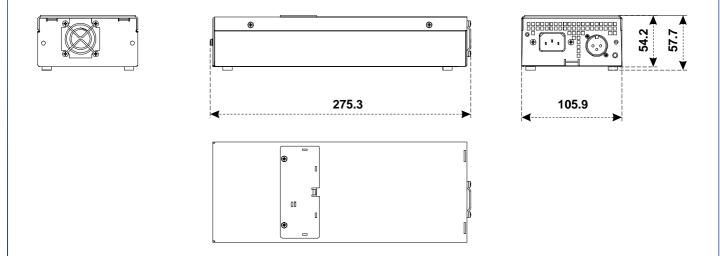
Dimensional sketch UPS 01 T (Universal Power Supply), table-top version rack module turn around 90° [all dimensions in mm, without cable and plugs]
